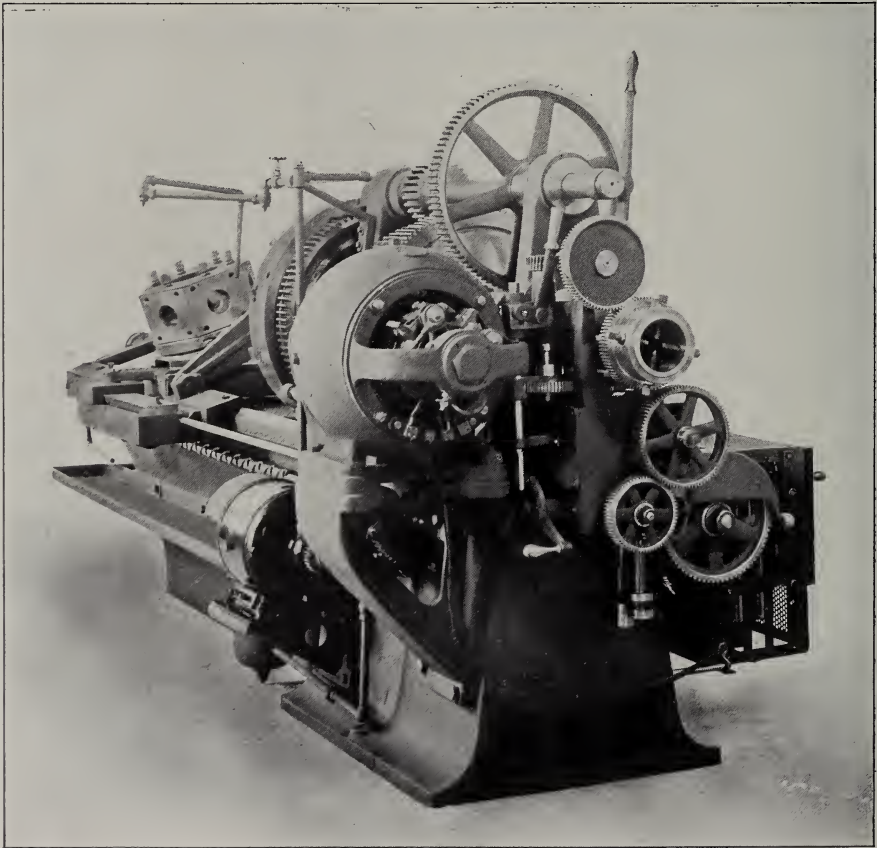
A REAR VIEW OF THE "GISHOLT" LATHE AND "NORTHERN" MOTOR SHOWN ABOVE
